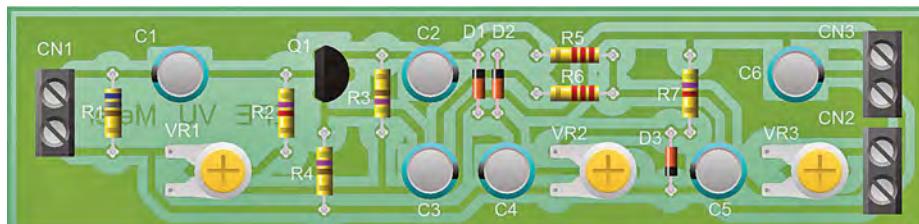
PCB component layout shown using Circuit Wizard's 'real world' view
